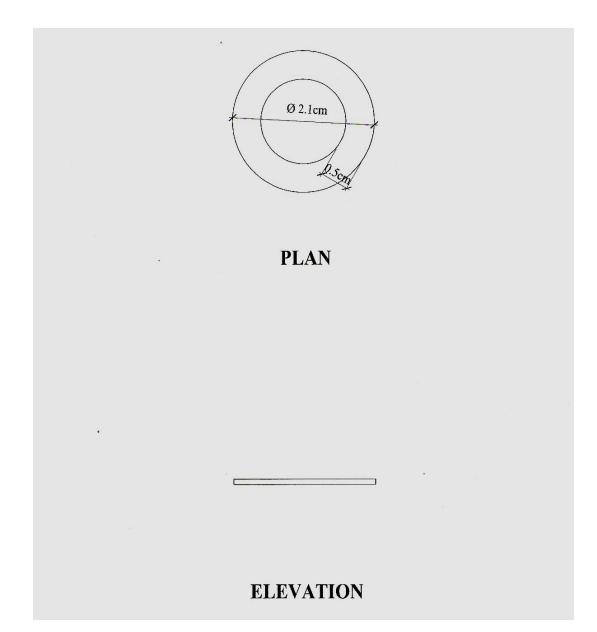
Diagram of compressor washer (plan and elevation)
